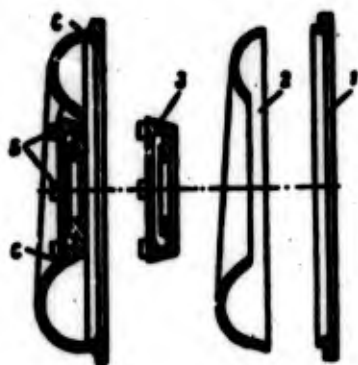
Welded casing of a turbine: 1 - flange; 2 - collector; 3 - ring.
